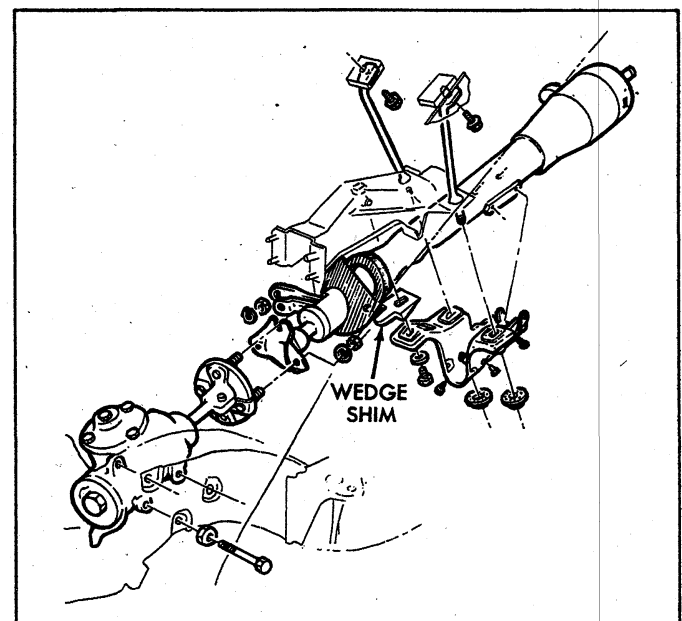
Instrument Panel Mounting Bracket—Camaro
